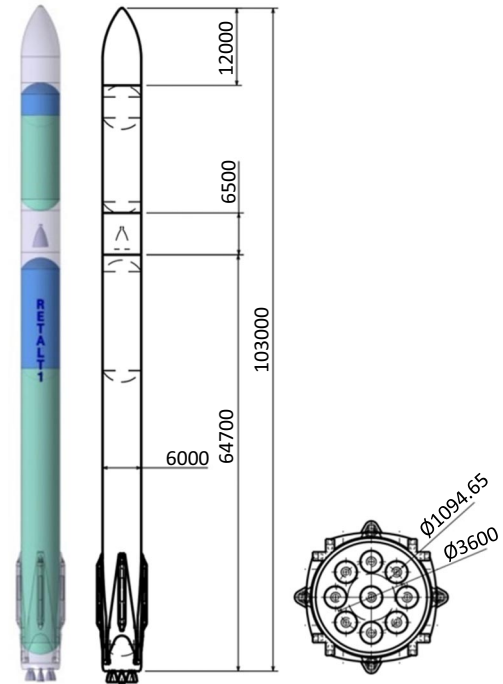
Outline of the RETALT1 configuration (adapted from [8]) (dimensions in millimeters).
